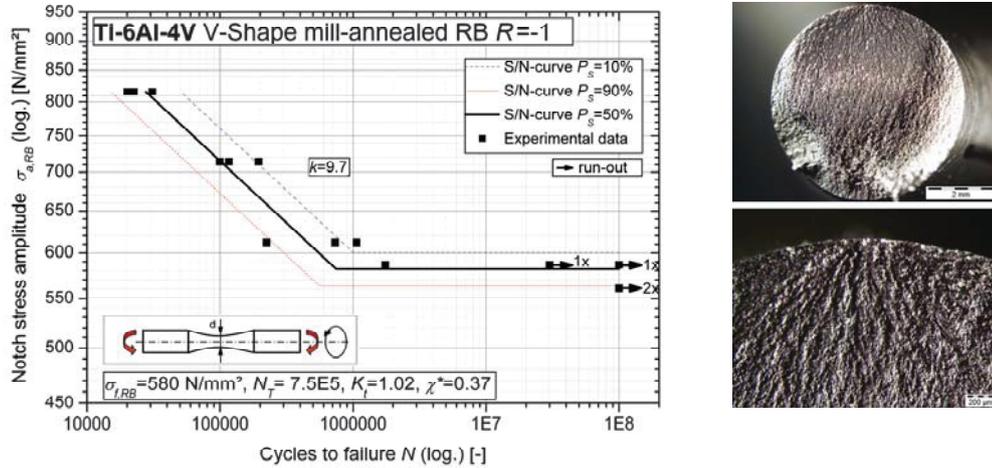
Rotating bending S/N-curve (l) and fracture surface (r) for V-shape mill-annealed unnotched
